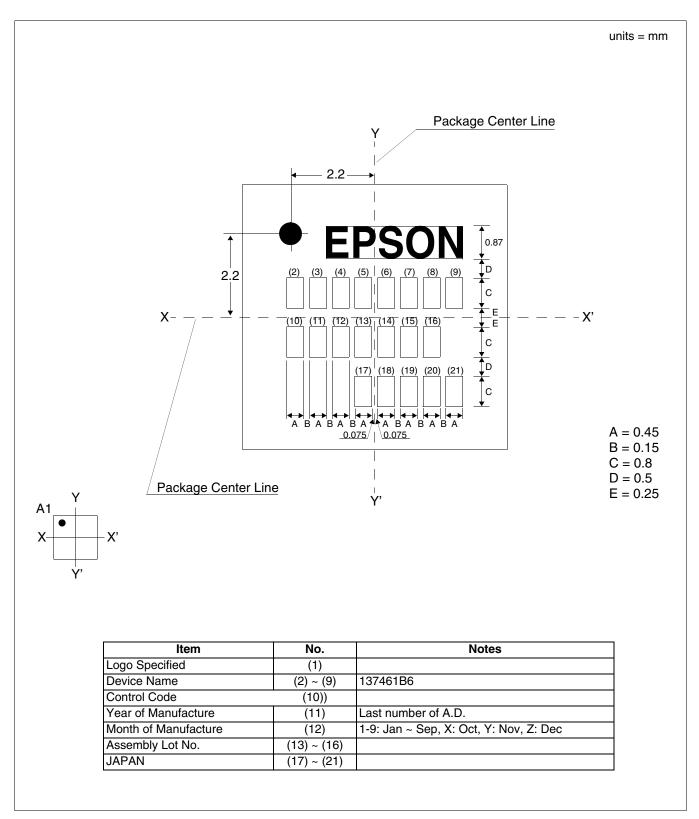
S1D13746 PFBGA 100-pin Package Marking
